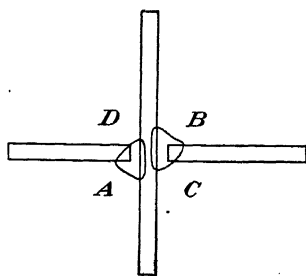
Top view of cross weld. Letters indicate order of deposit.
